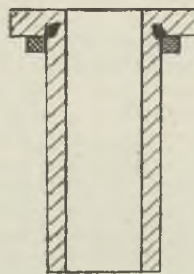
LEONARD DEFECT IN FLANGED CASTING.
